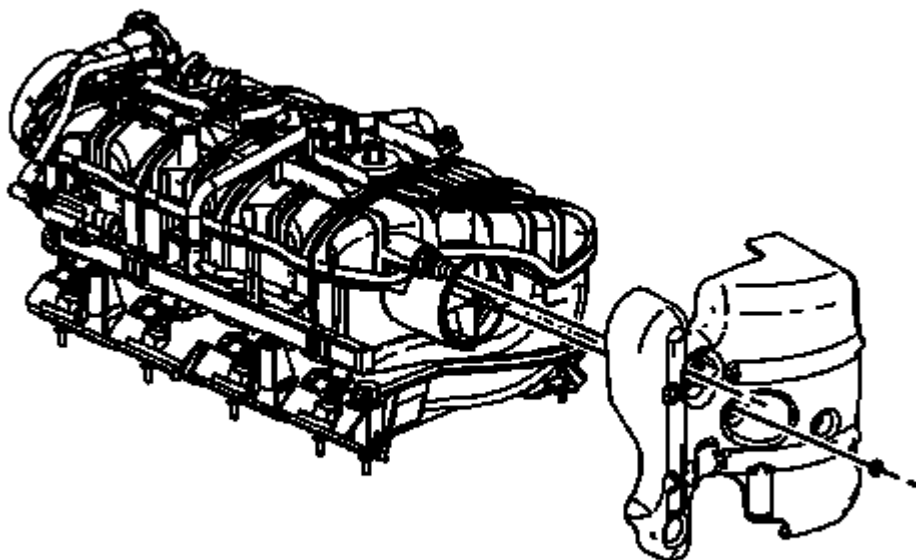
View Of EVAP Tube & Purge Solenoid
